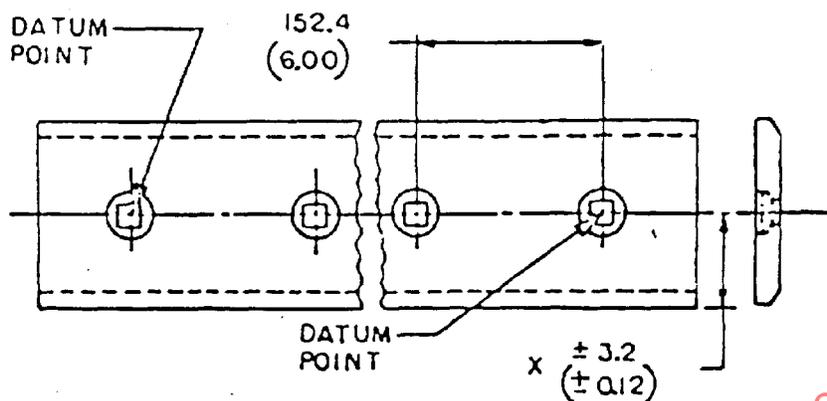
TOLERANCES AND DIMENSIONS FOR HOLE LOCATIONS
